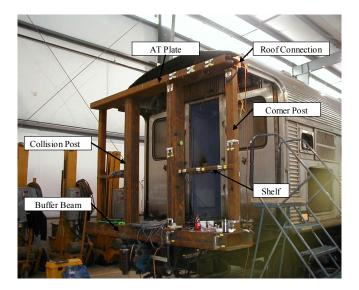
A Photograph of the Fabricated 1990's End Frame Design
